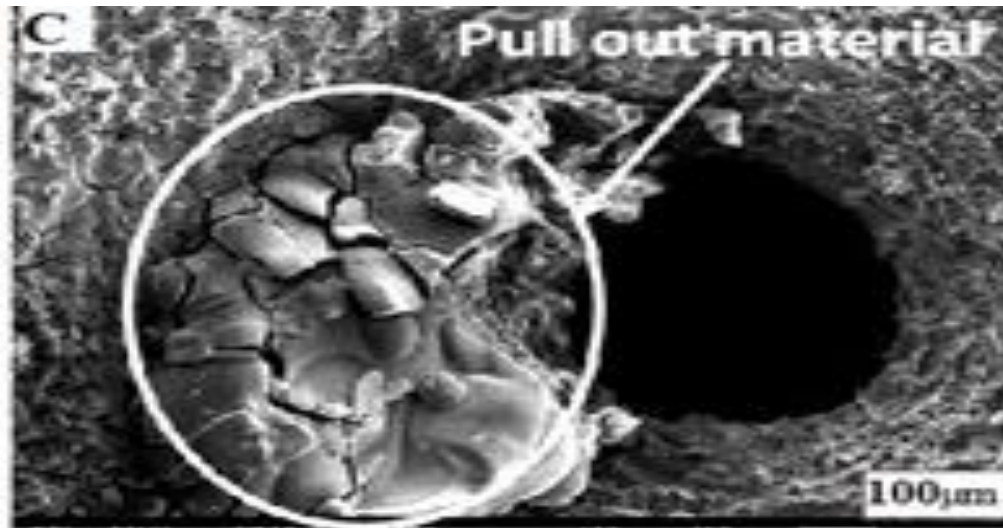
SEM Photographs of Micro Machined Holes Machined at Higher Level of ECMM Machining Parameters
